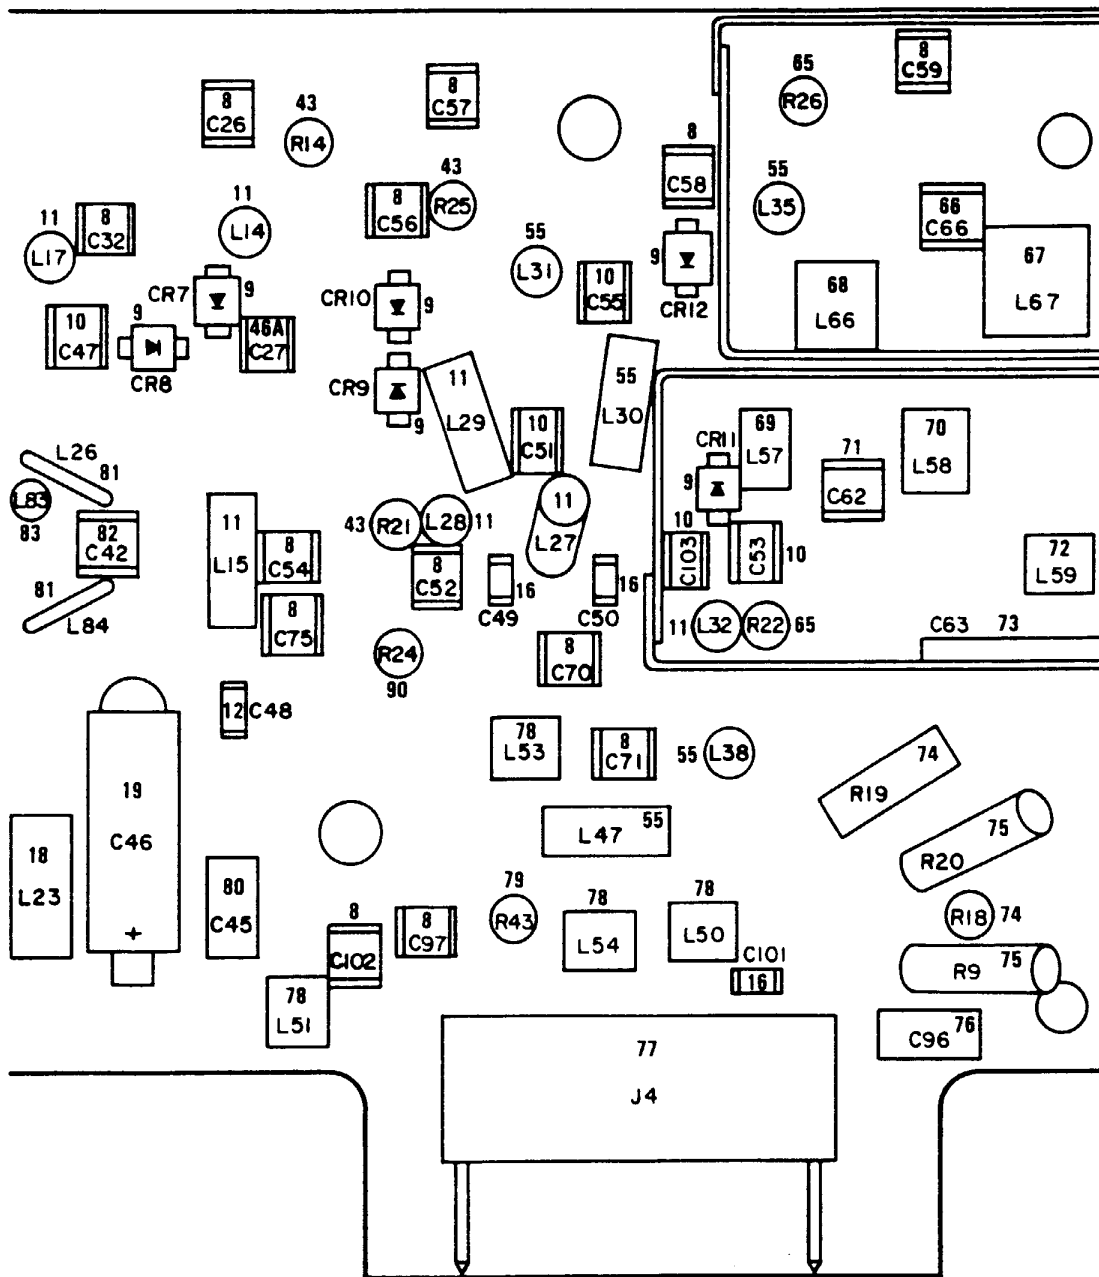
Transmitter Circuit Card Assembly (Sheet 1 of 4)
